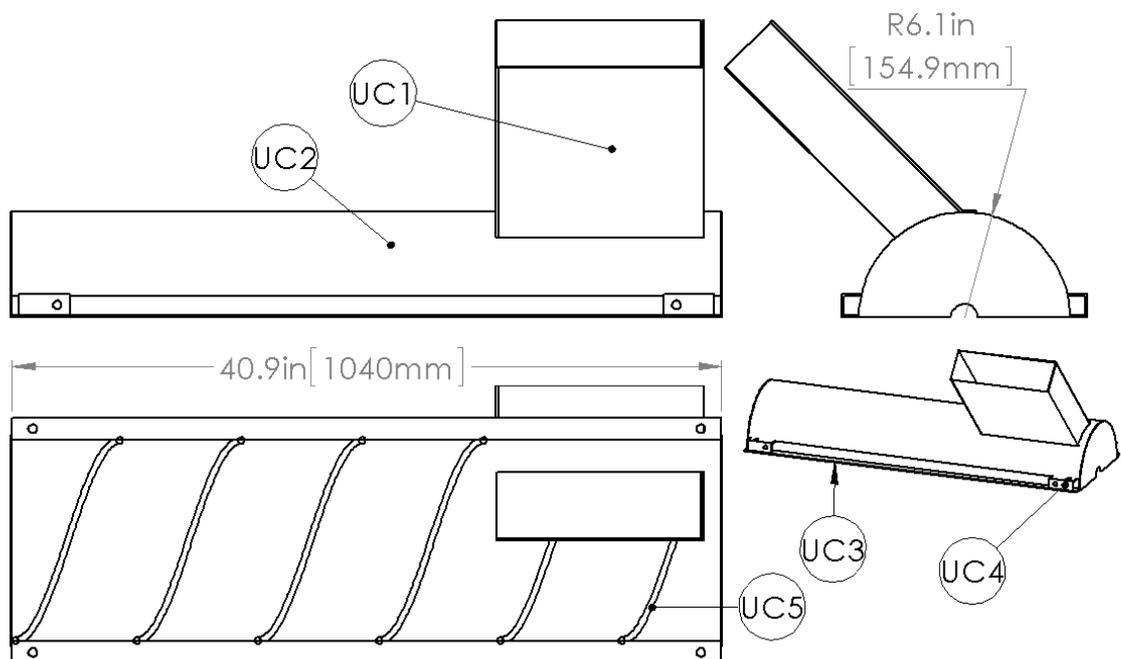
Drawings of the upper concave of the threshing machine. Source: Author.
